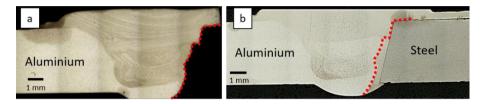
Comparison of (a) the crack propagation path in a broken tensile specimen with its location (b) inside the weld zone. Obviously most of the fracture occurs within the Al FM and not along the bond line.
